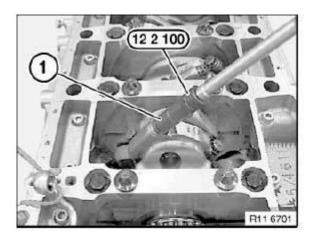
Identifying Connecting Rod Bolts And Special Tool 12 2 100 Courtesy of BMW OF NORTH AMERICA, INC.
